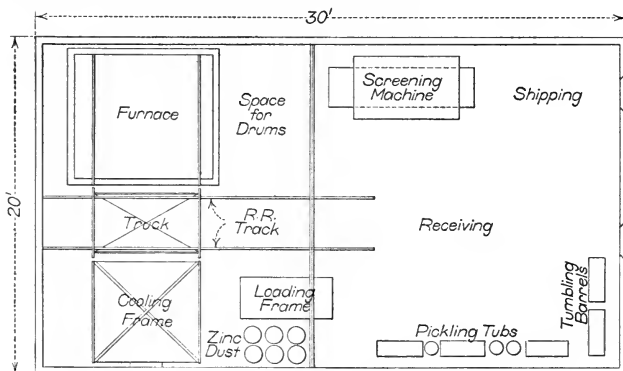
FLOOR PLAN OF SHERARDIZING PLANT
